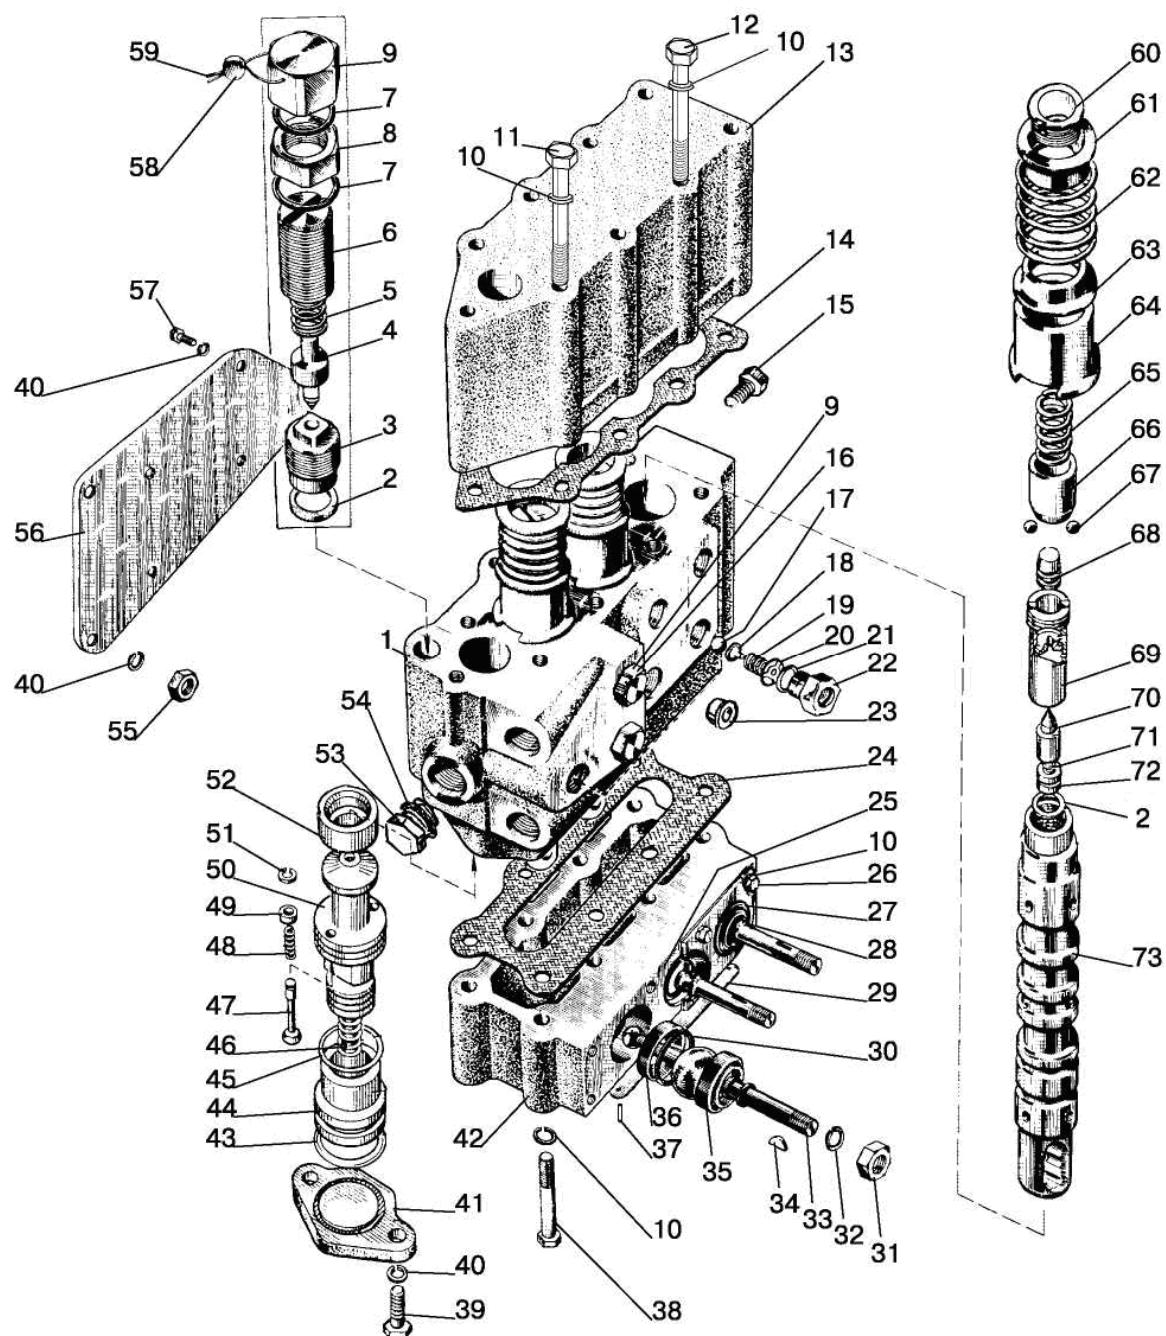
Hydraulic distributor P80-3/4-222-3Г
